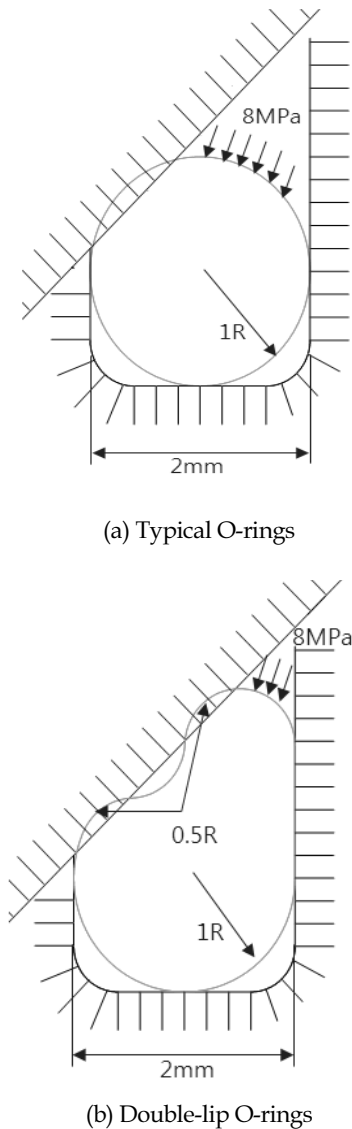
NBR O-rings for a check valve of CNG fueling nipple.
